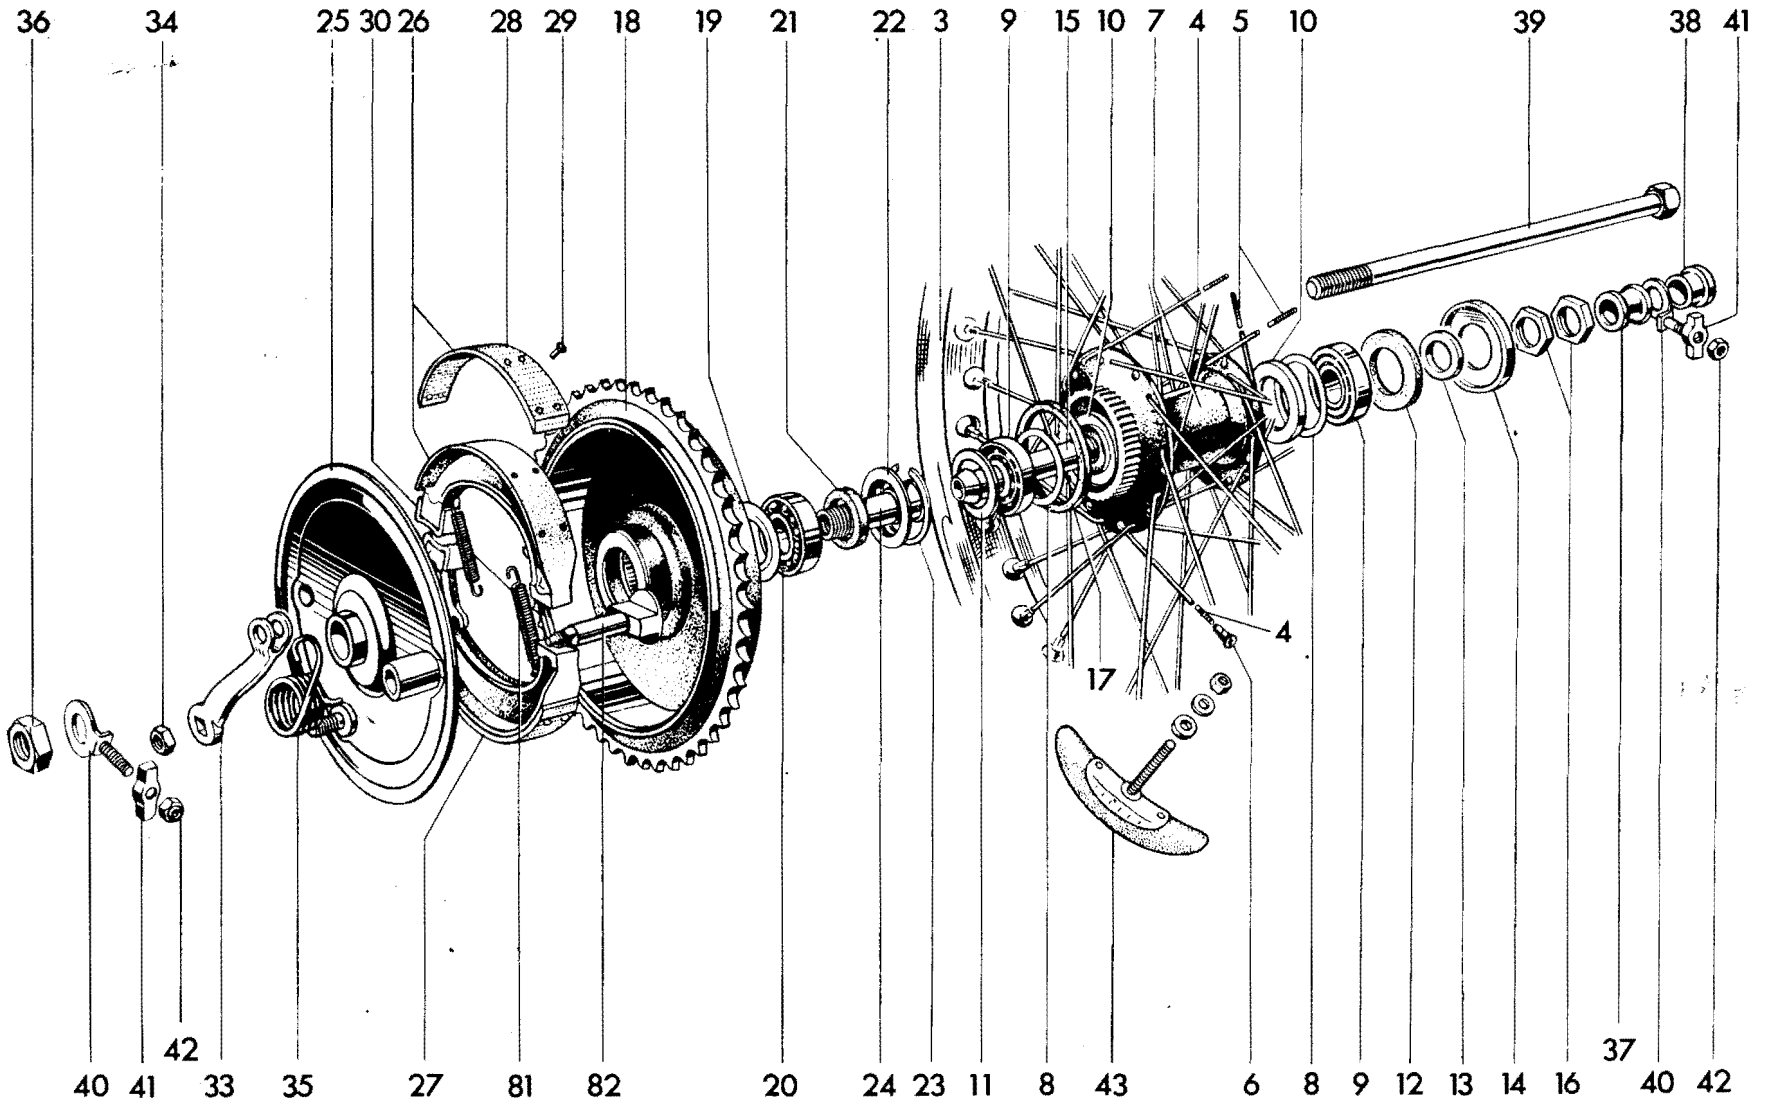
QUICKLY DETACHABLE REAR WHEEL
